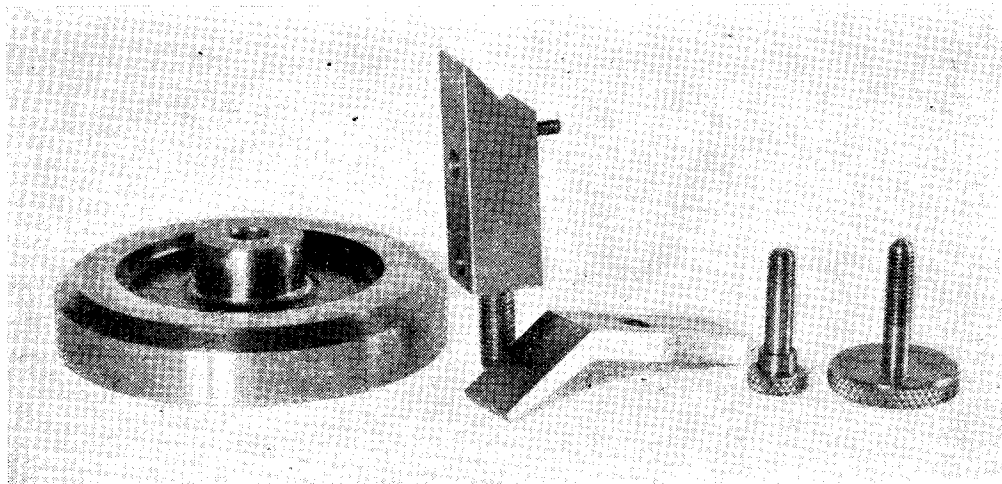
The stand components, left to right : (A)—the base ; (B)—the body ; (C)—the clamp arm ; (D)—the pivot and clamp-screws
